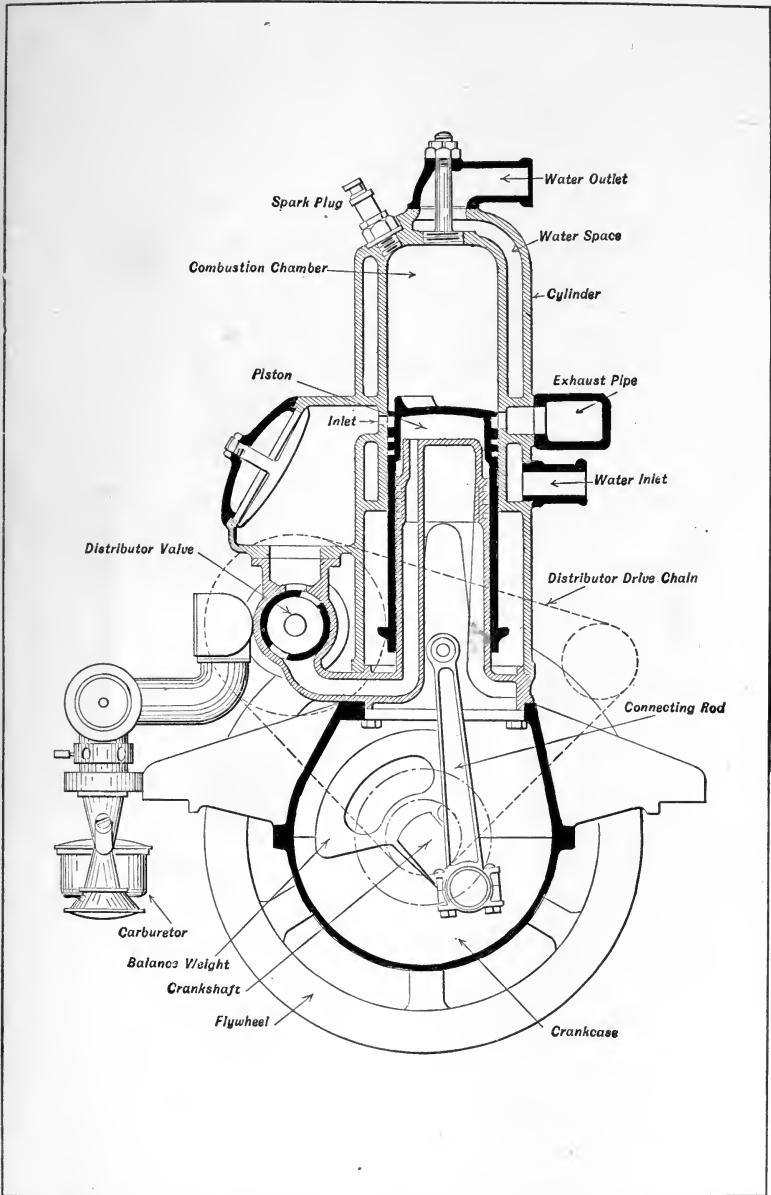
Sectional View Showing Construction of Legros (French) Motor Defining Peculiar Cylinder Construction.
